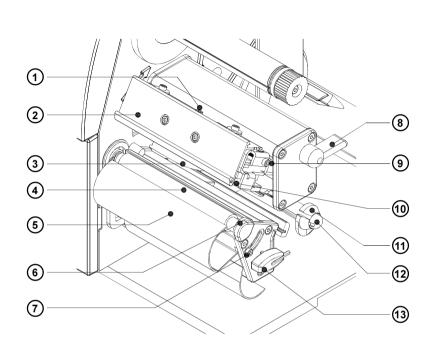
Print mechanism M4/200R, M4/300R with printhead open
